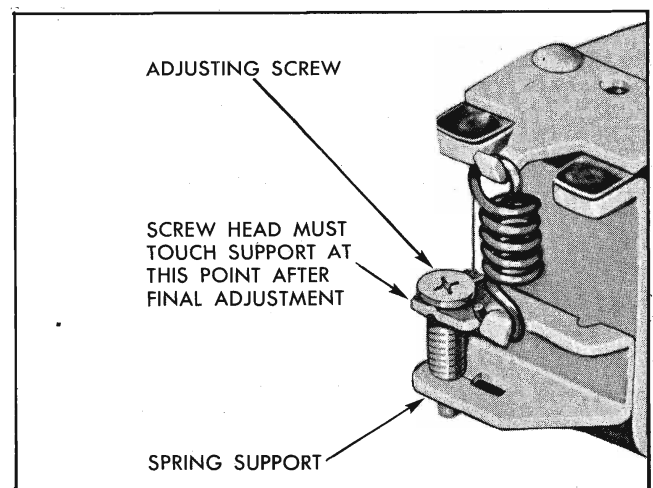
Proper Relationship of Spring Support and Adjusting Screw
